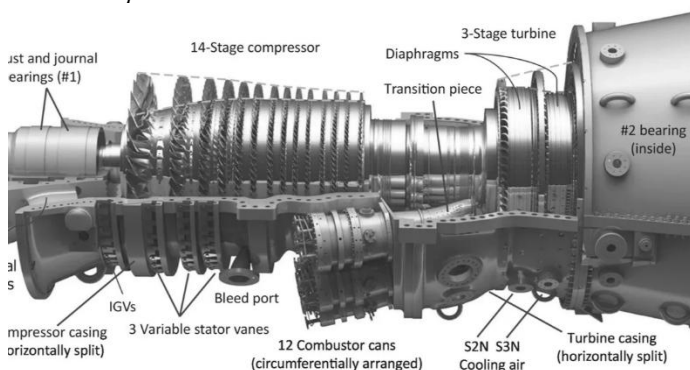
A Cascade Of The Compressor Blade, Combustion Chamber And Turbine Blades
